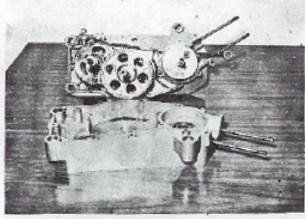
With the housing removed, the gears and crankshafts are revealed. These can be removed or repaired with no special tools needed.
